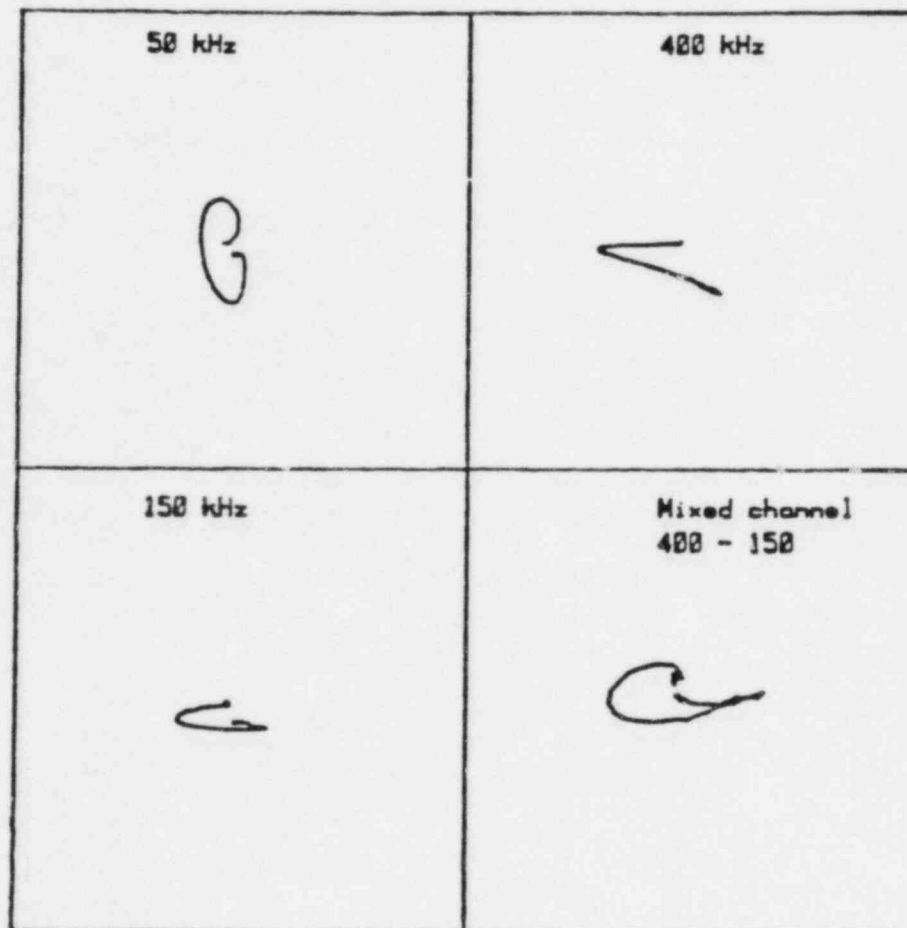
E.C. signal from a 40% ASTM standard machined on the tube O.D. in the expansion transition region of sleeve-tube assembly (cross wound coil probe).
